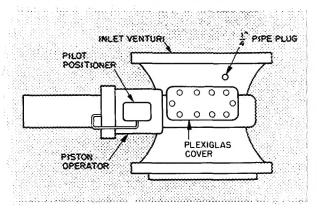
Pneumatic Vane Shaft Seal Chamber
